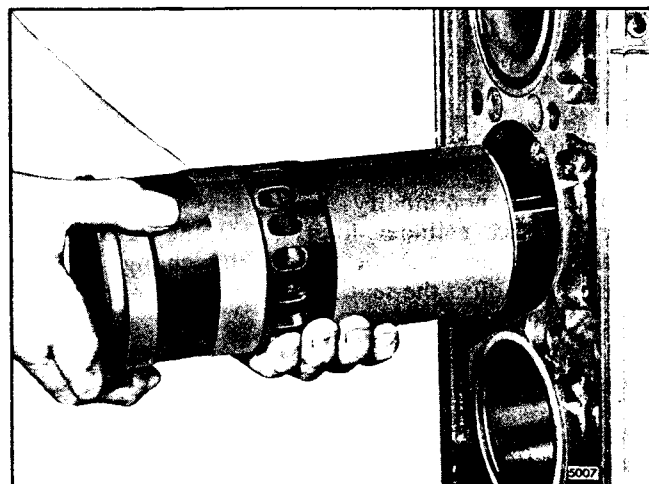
Installing Piston, Connecting Rod and Liner Assembly in Cylinder Block
